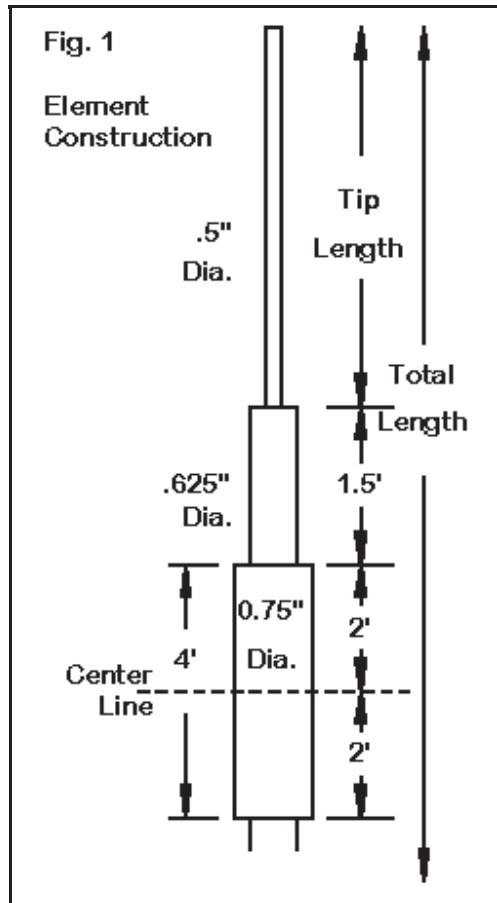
shows the element structure that all of the beam designs will use. The 4' center section is 3/5" tubing, with a short 1.5' (plus 3" for overlap) section of 5/8" tubing following. The "tips" are 1/2" tubing. All this can be obtained from sources that advertise in QST or CQ. In the element length
